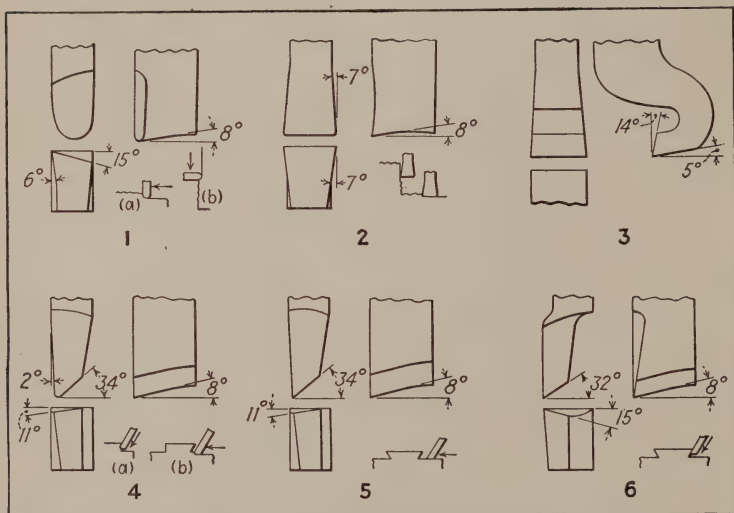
Planer tools recommended by The G. A. Gray Company.
